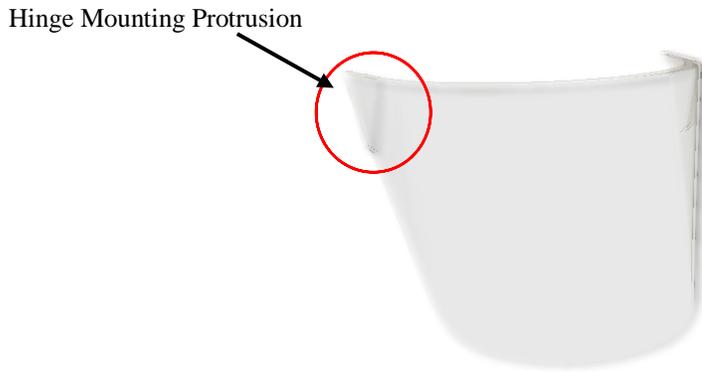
The 3D model of the face shield with one of the attachment piece protrusions highlighted.
